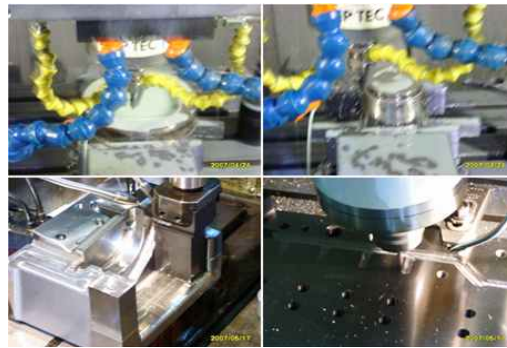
Manufacturing of rectangular 4cavity Flat type IML die parts
